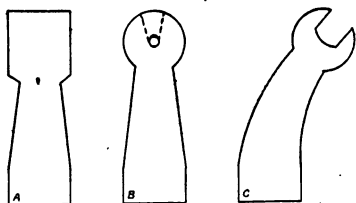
S Wrench. A—Stock with shoulders worked out. B—Rounded, holes punched, ready for splitting. C—Jaw worked out and shaped.
